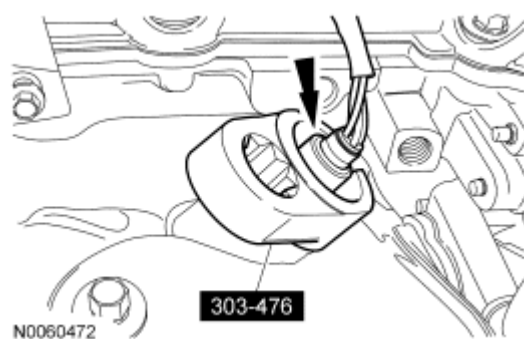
Identifying RH HO2S & Special Tool (303-476)
